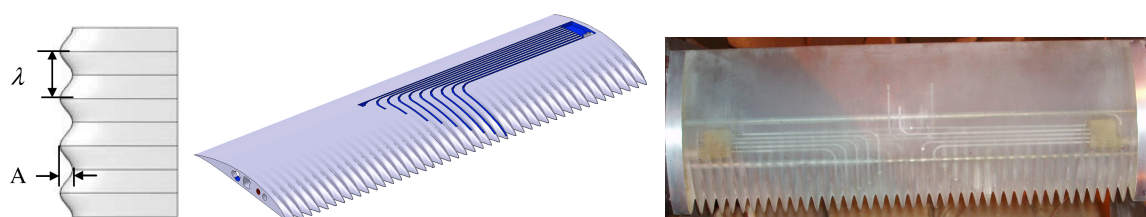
FLOCON wing design: CAD drawing (left) and manufactured wing (right)
